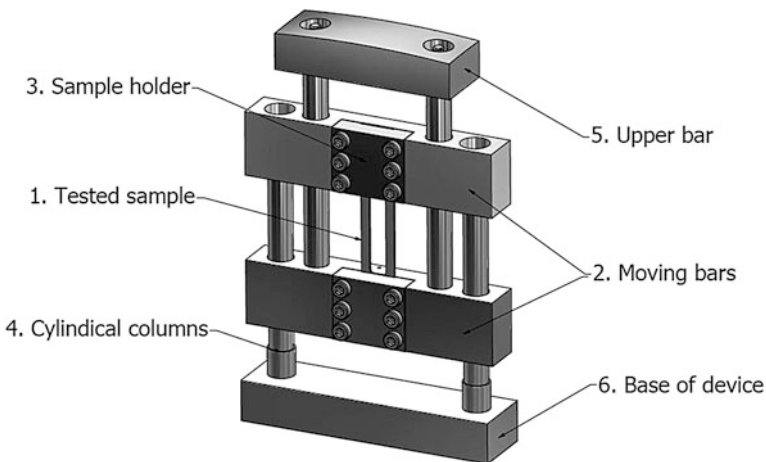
Reversing system—mechanical device for attaching of the frame-shaped sample and for conversion compressive to stretching load [5, 6]
